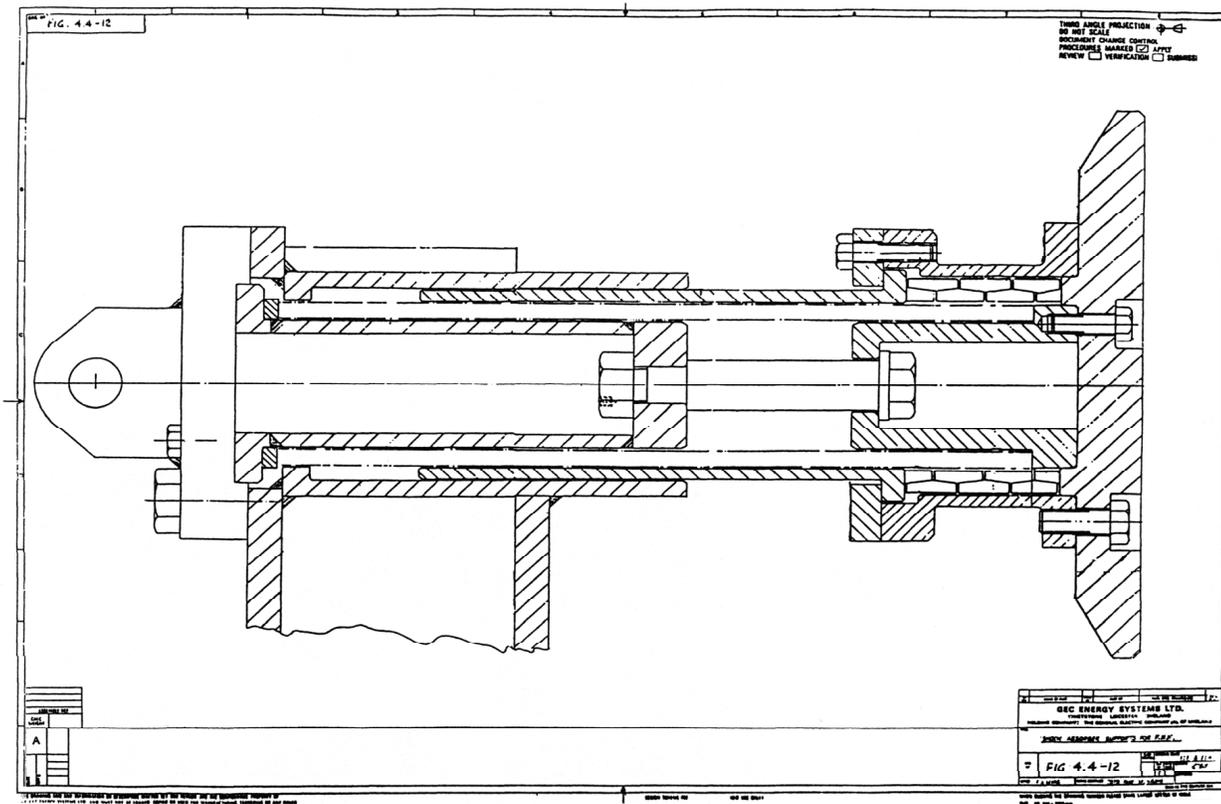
Shock Absorber Supports For Fuel Handling Machine.
